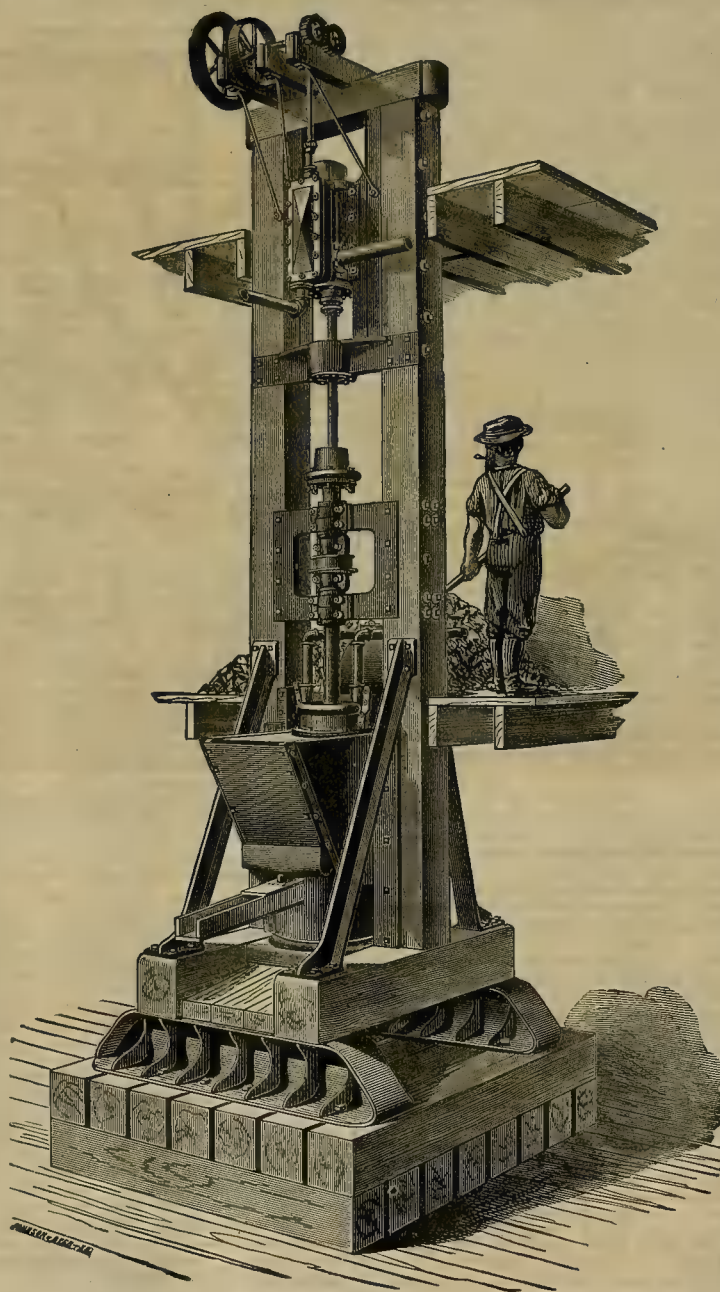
PERSPECTIVE VIEW OF THE BALL STEAM STAMP. (See Page 345.)
